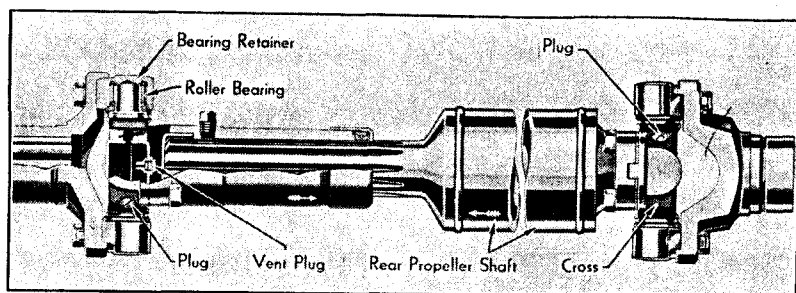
Cadillac propeller shaft and universal joints. The front universal joint must be installed on the propeller shaft with the arrows on the splined sleeve and on the shaft in line.
